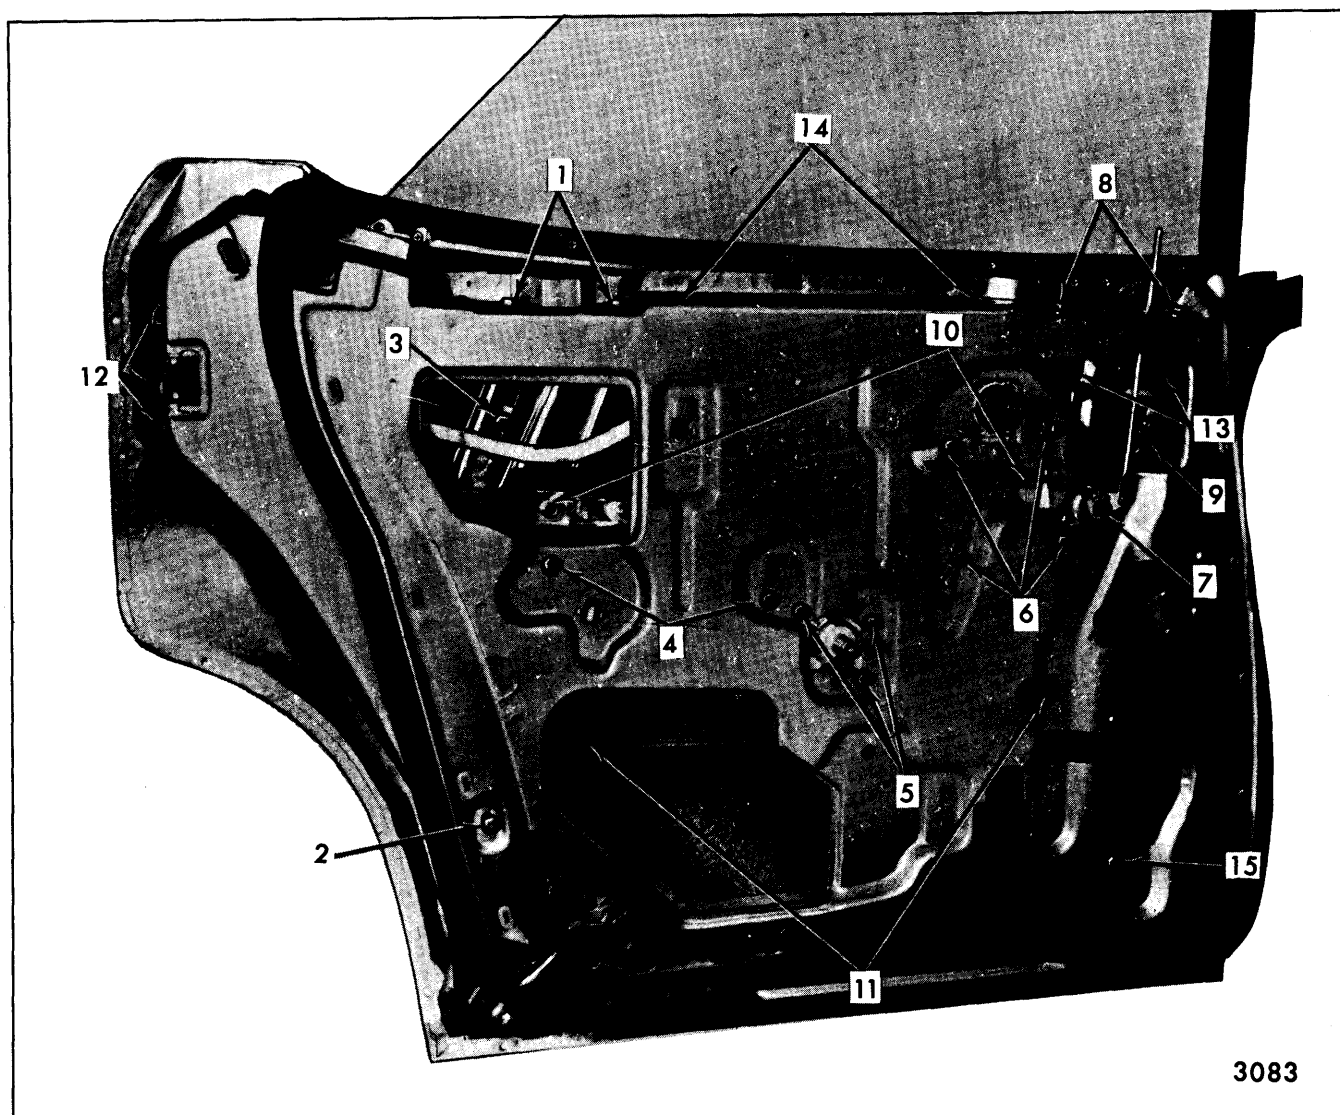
Rear Door Hardware - "B-39" and "C-39, 49 and 69" Styles
